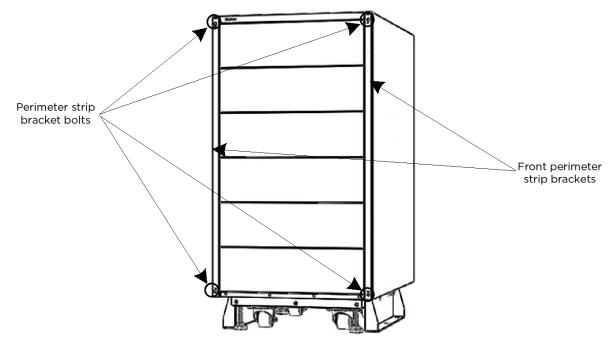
Removing the Front Perimeter Strip Brackets – BCT6L9N225
